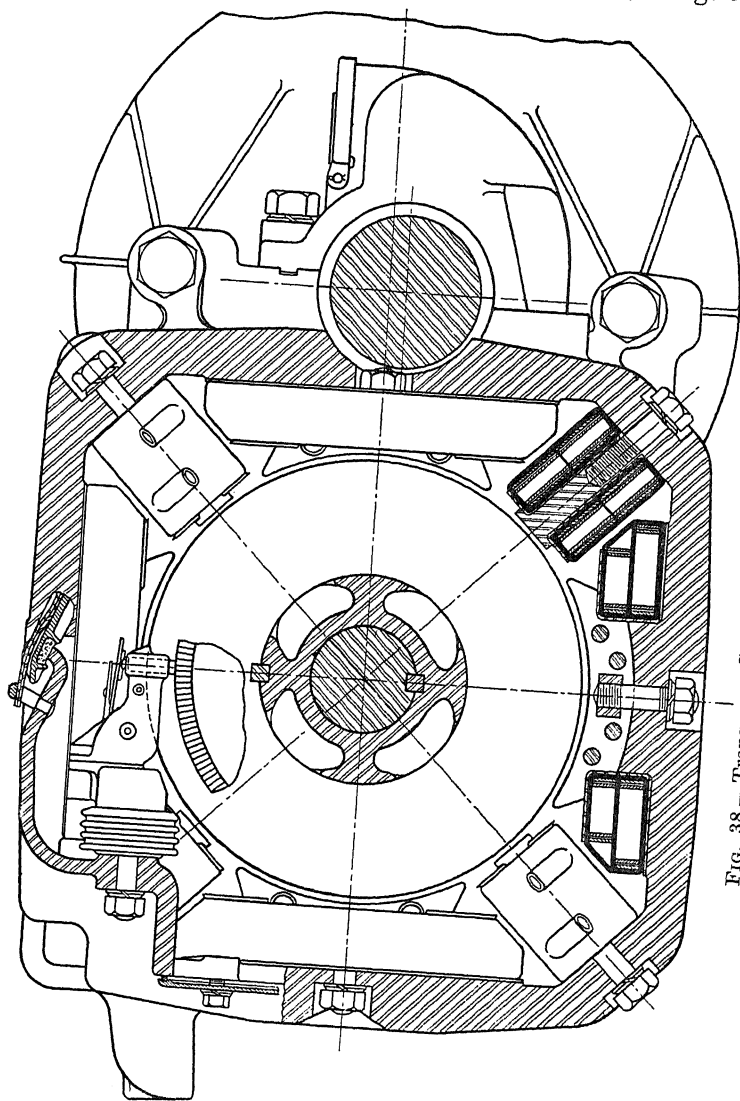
Transverse Section of Enclosed Railway Motor.
